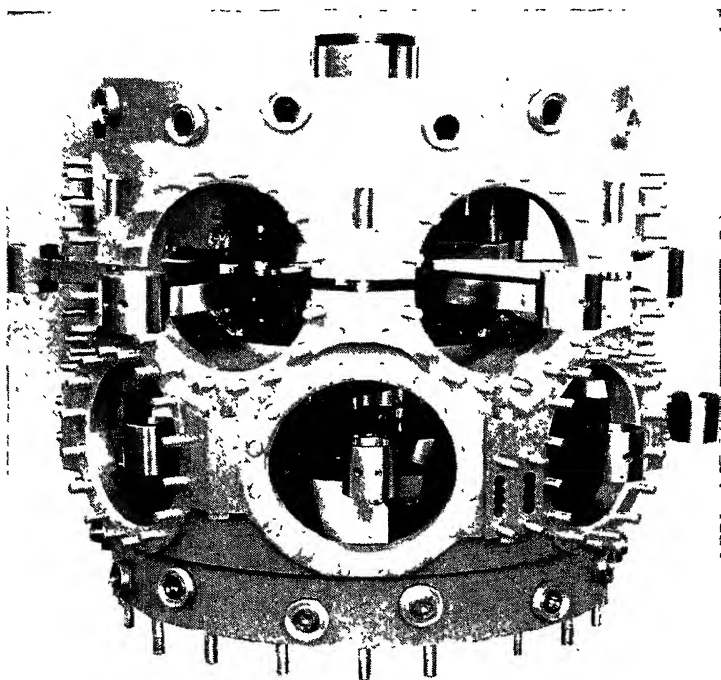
Main crankcase assembled with the crankshaft and articulated-rod systems of a twin-row radial engine. The front portion of the crankcase has just been lowered into place. (*Aluminum Company of America.*)
